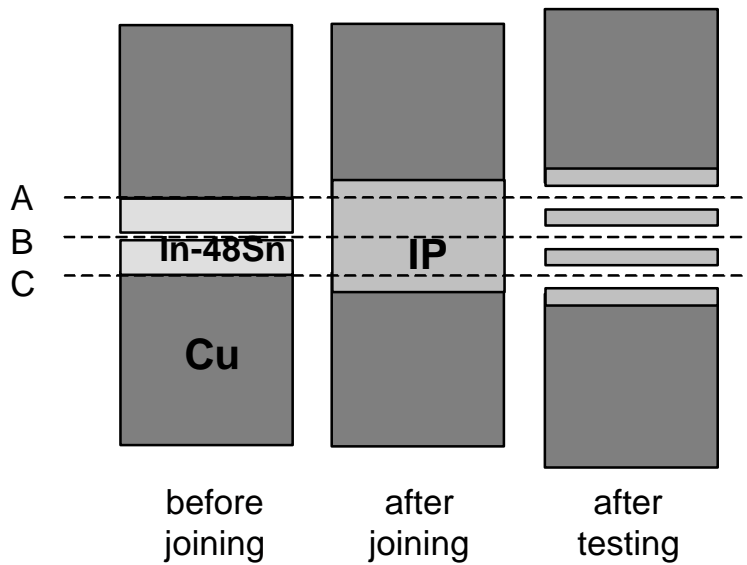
Schematic cross-section of a fractured joint after the mechanical testing.
